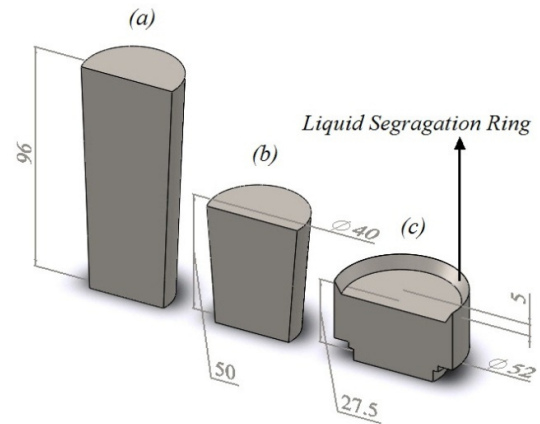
Schematic figures of manufactured specimens (a) casting (b) feedstock before thixoforming (c) thixoformed specimen (Unit: mm).
